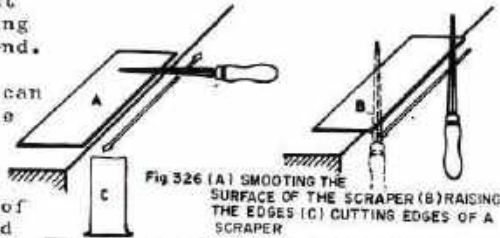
(A) SMOOTHING THE SURFACE OF THE SCRAPER (B) RAISING THE EDGES (C) CUTTING EDGES OF A SCRAPER
